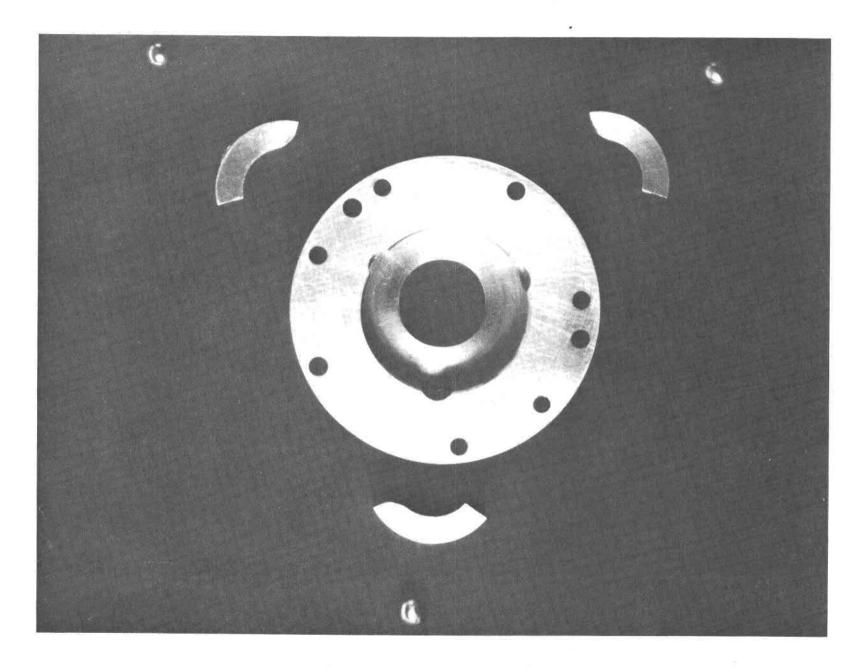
Original Design (Barber-Nichols) Three-Pad Spherical Pivot Tilting-Pad Journal Bearing
